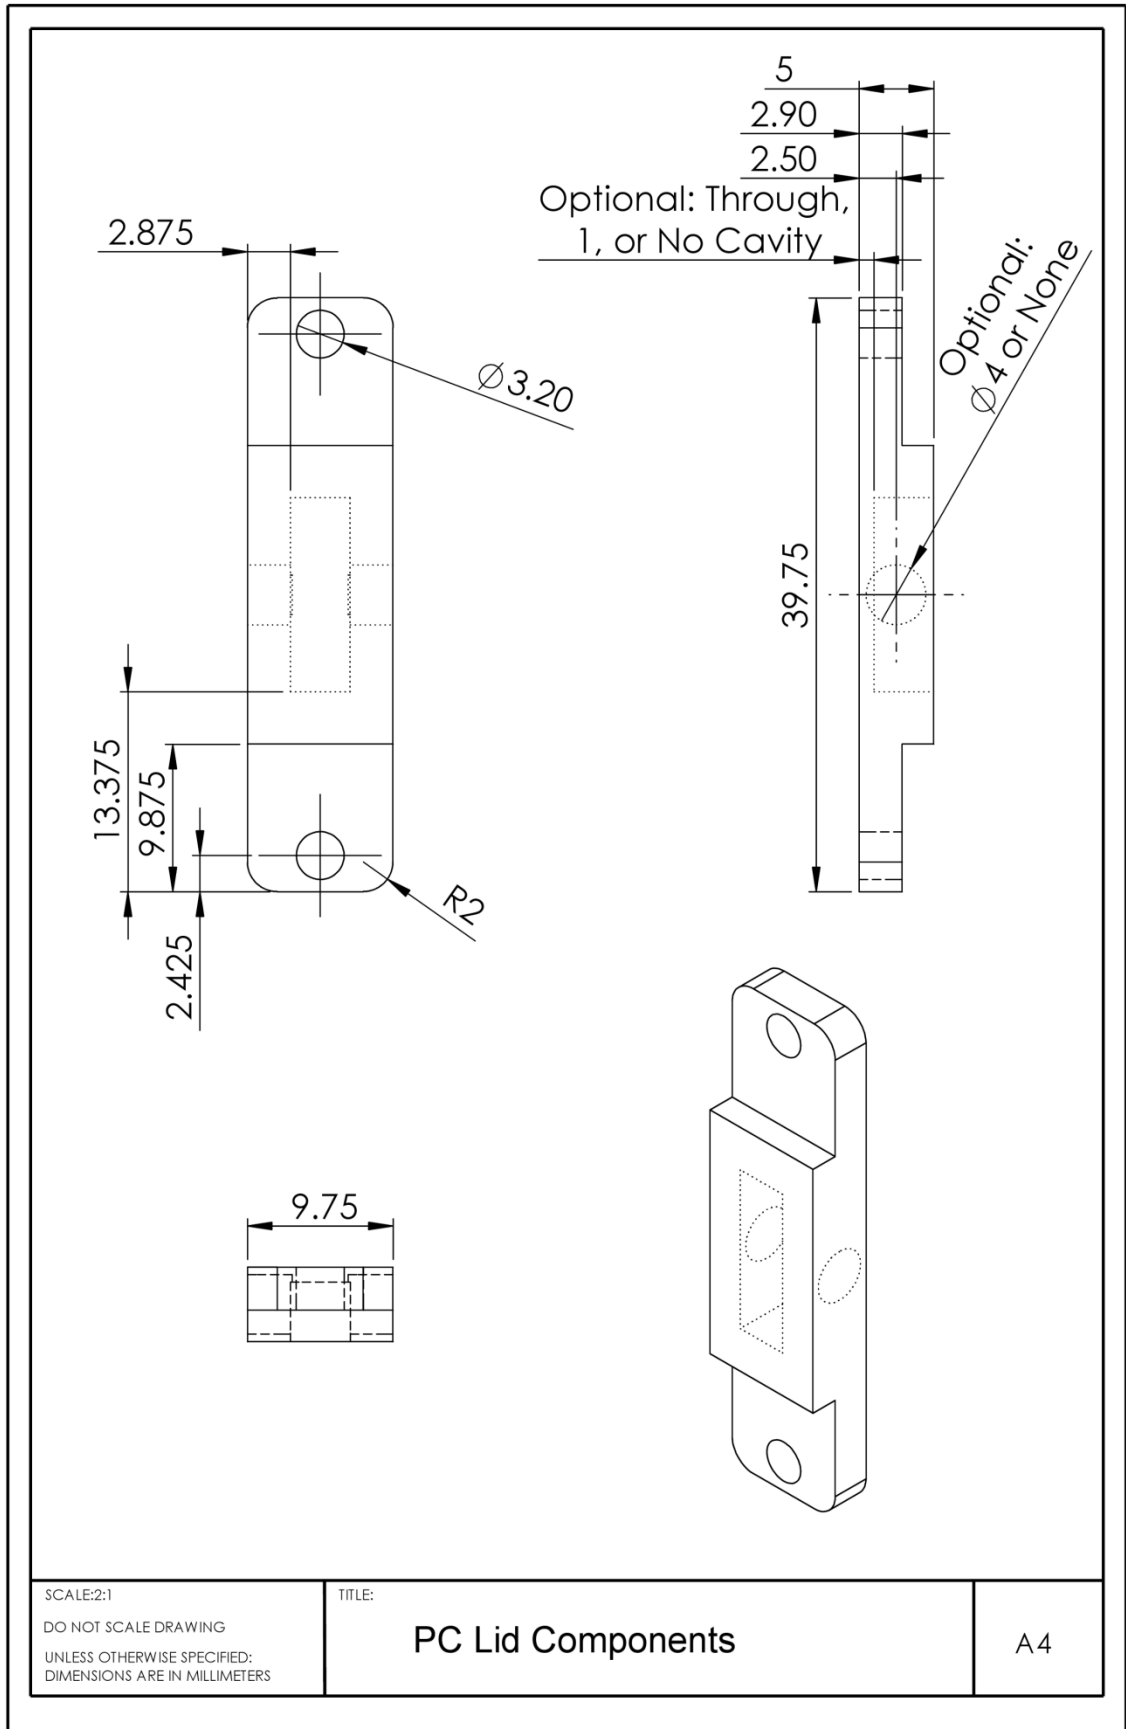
Technical drawing of polycarbonate lid component with options for closed, open, or gas connection.
